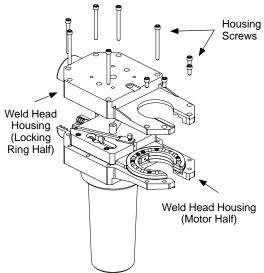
Removing the Locking Ring Half of the Weld Head Housing
